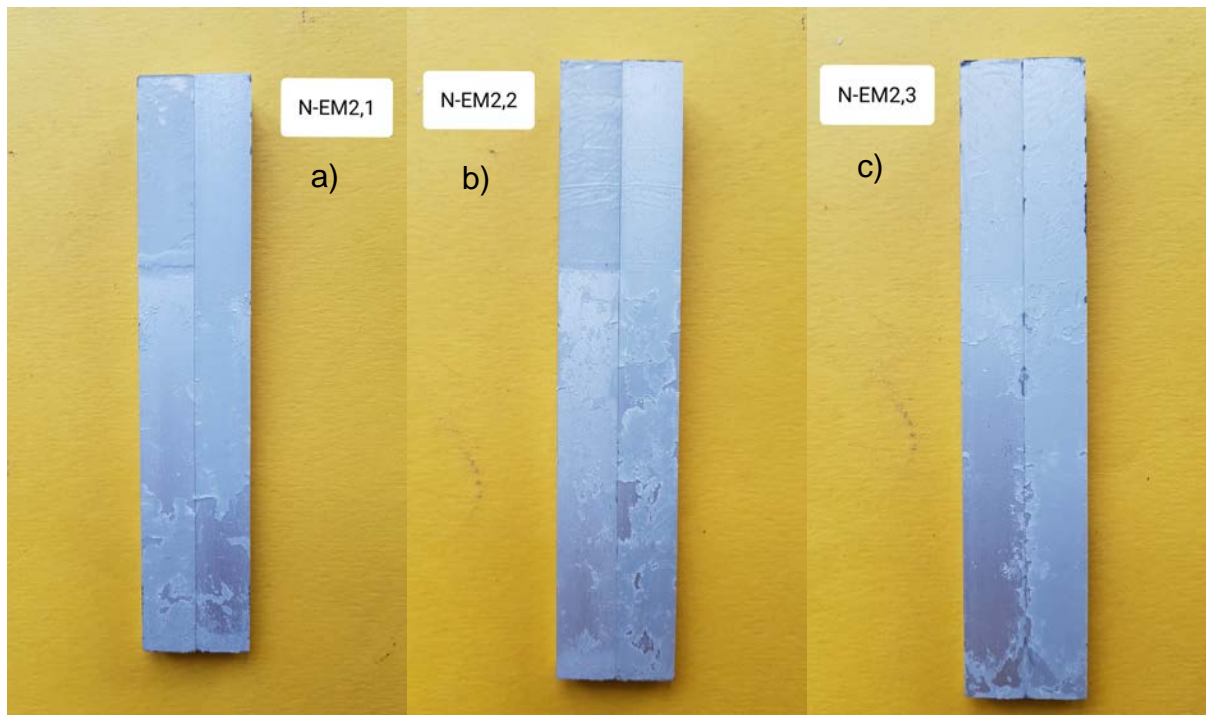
Fracture surfaces of nanomodified specimens (1).
